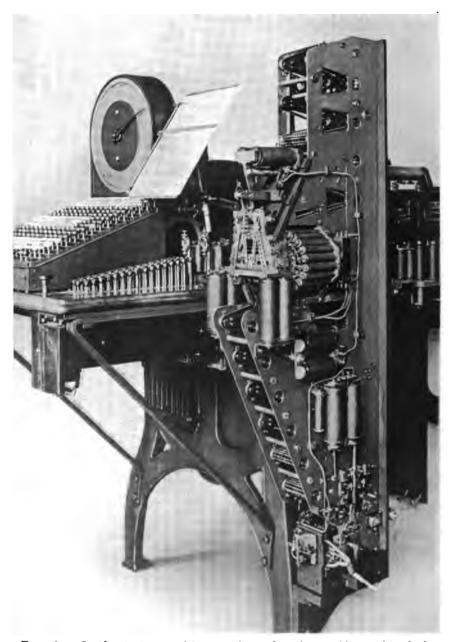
Graphotype (new model) composing and casting machine; enlarged view of right-hand side showing controller magazines and controller-elements. To face plate LII.]
